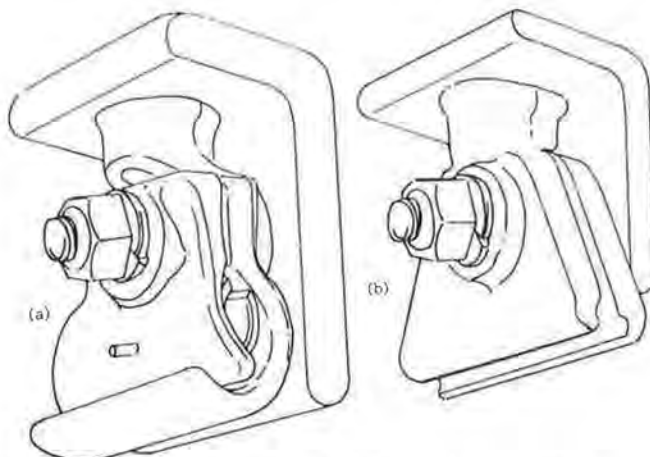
Messenger clamp (a) and trolley wire clamp (b).
